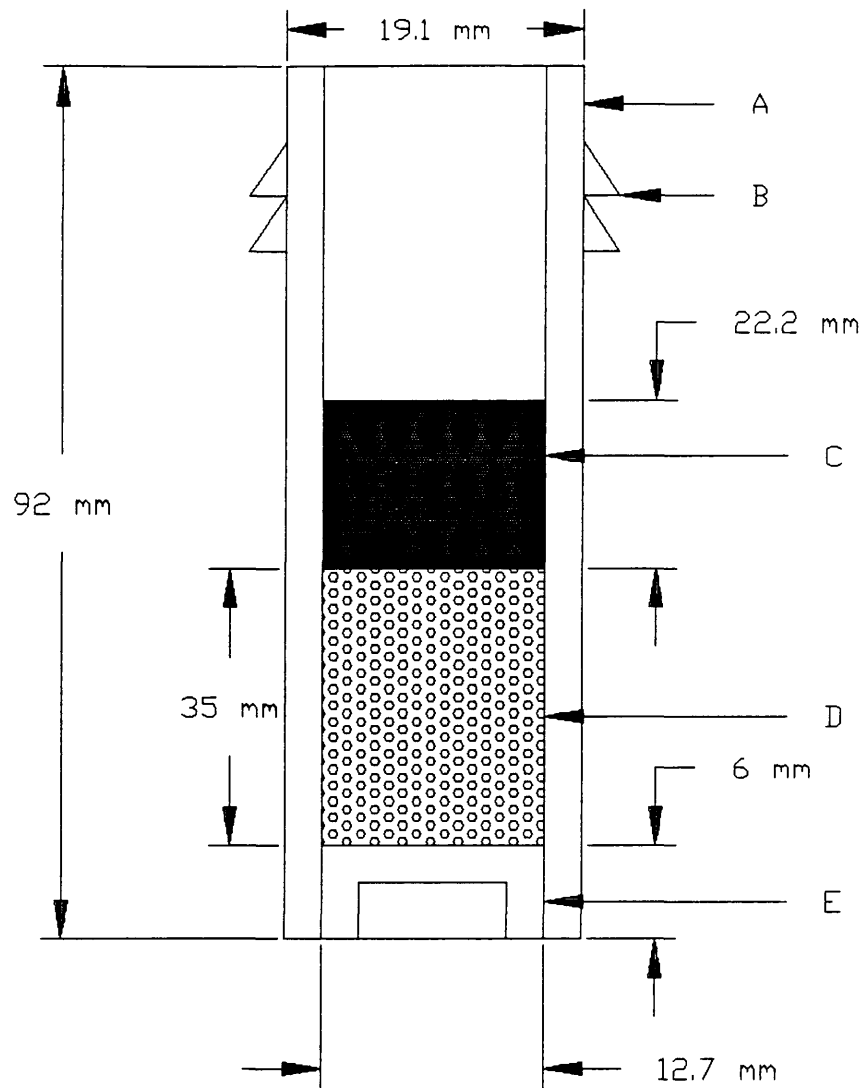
Schematic diagram of the infiltration fixture: A) 304 stainless steel seamless tube, B) Brass ferrule compression fitting, C) Aluminum slug D) Silicon carbide compact, E) 15 μm pore diameter stainless steel filter.
